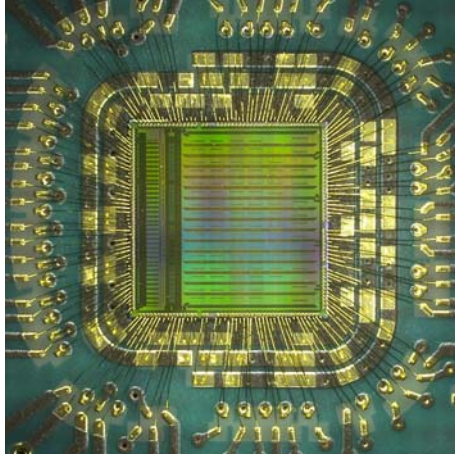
SPADIC1.0 chip bonded to readout PCB.
